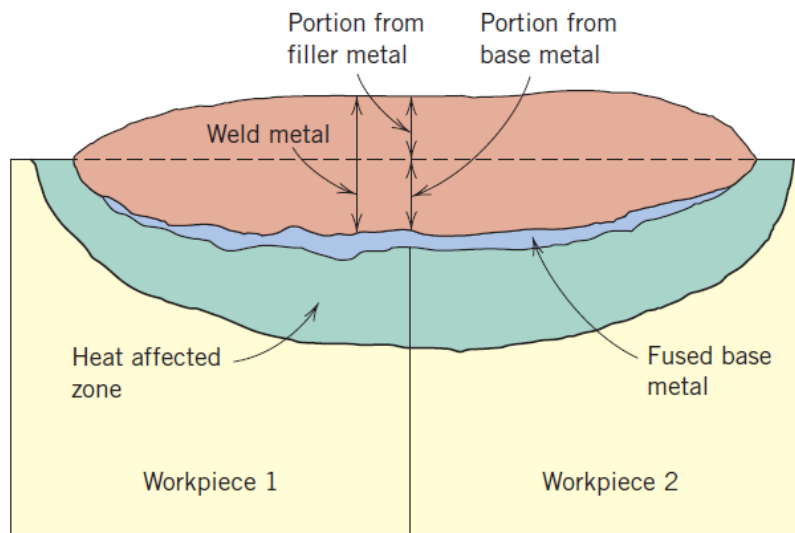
Typical cross section of fusion weld ([3])
